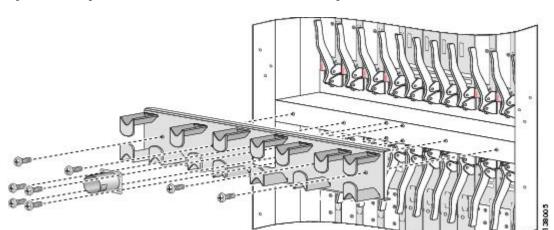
Attaching the Rear Door Strike Tube and Mid-chassis Cable Management Bracket
